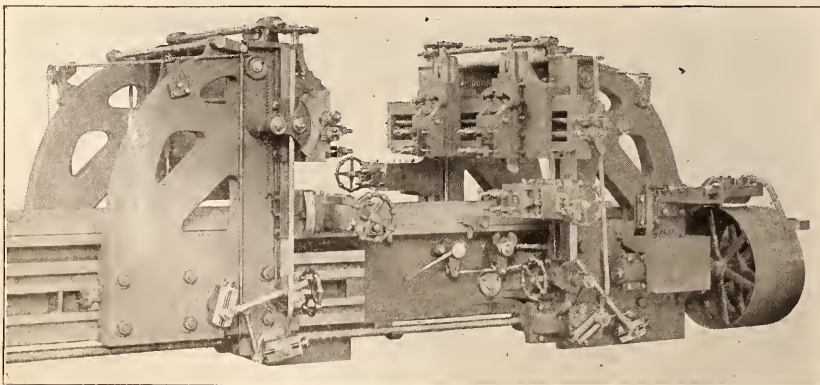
LOCOMOTIVE CONNECTING ROD PLANER—MANUFACTURED BY WOODWARD & POWELL PLANER CO., WORCESTER, MASS.
